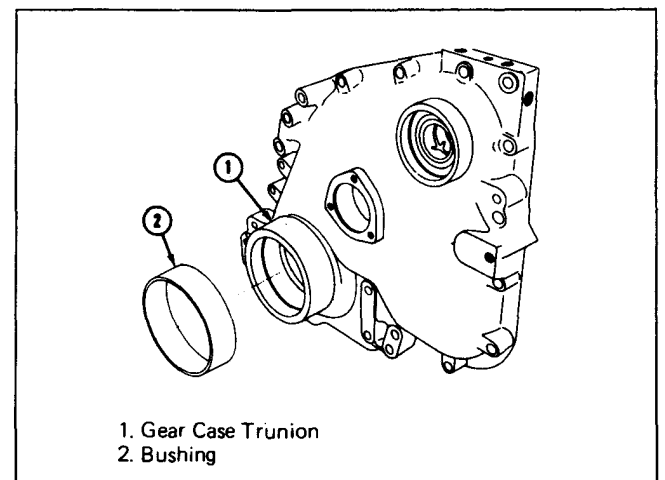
, (N10145). Gear case cover and trunnion bushing
